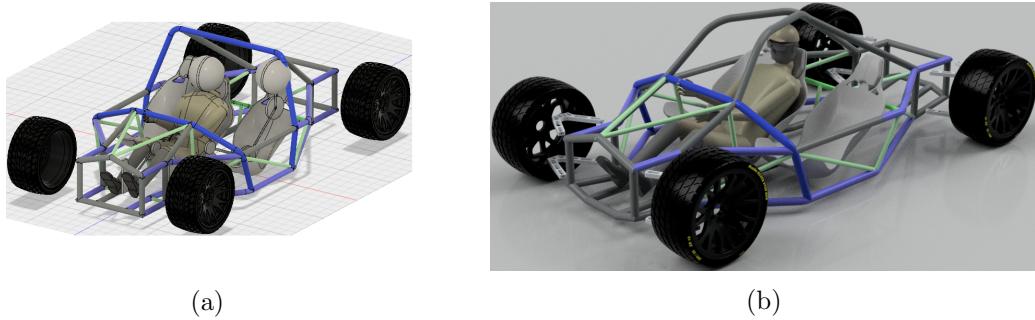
DIS1 initial chassis design and modified chassis [1].
